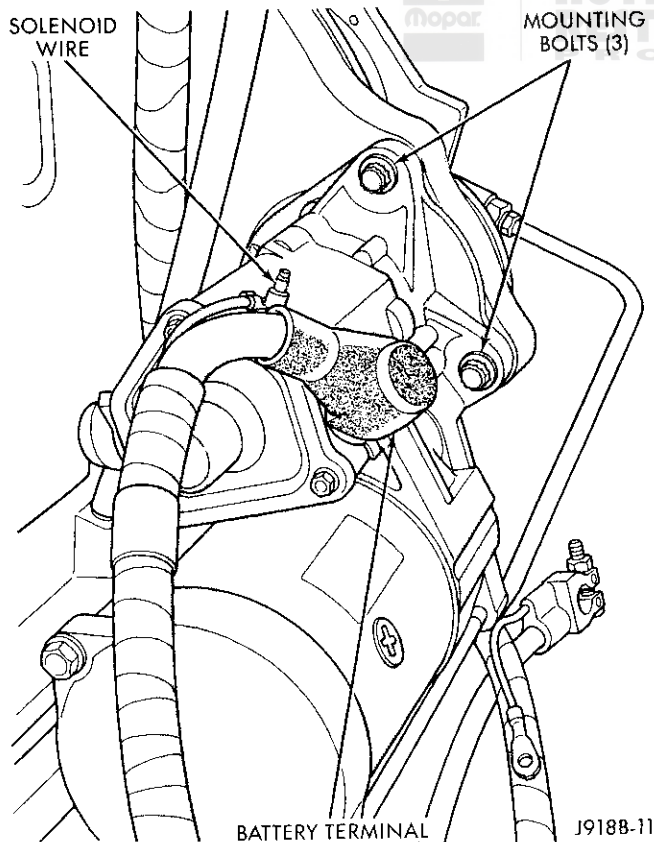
Starter Connectors Remove/Install - Diesel Engine
